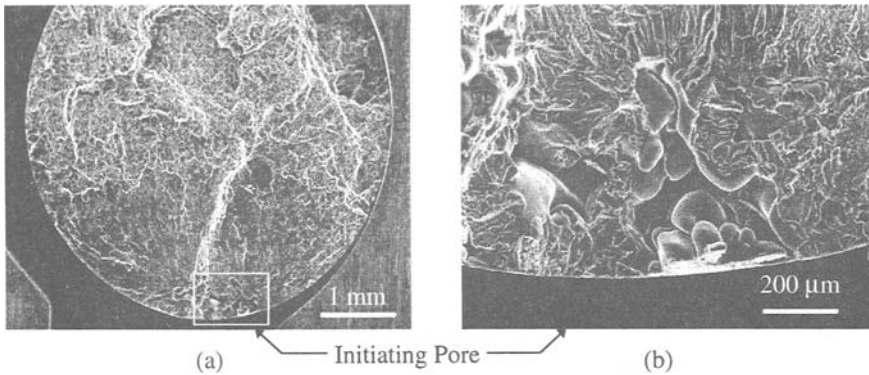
Fracture surface of a W319-T7 Al fatigue specimen. (a) The fatigue crack initiated from the microshrinkage pore outlined in the white box. (b) The initiating pore is located at the specimen surface and has a maximum dimension of $\sim 800 \mu\text{m}$.
